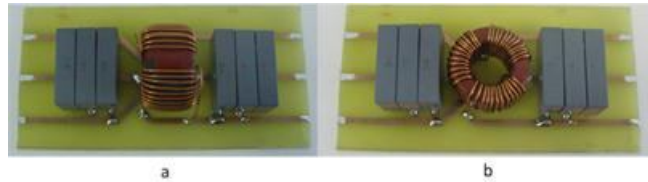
(a) Filter prototype with vertical CM choke; (b) Filter prototype with horizontal CM choke.
